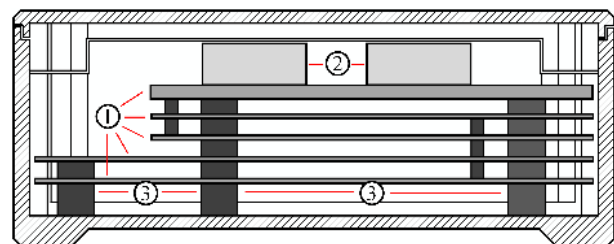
Shielding enclosure with mounted PCBs, mounting screws, and toroidal cores of the EMI-filter.
